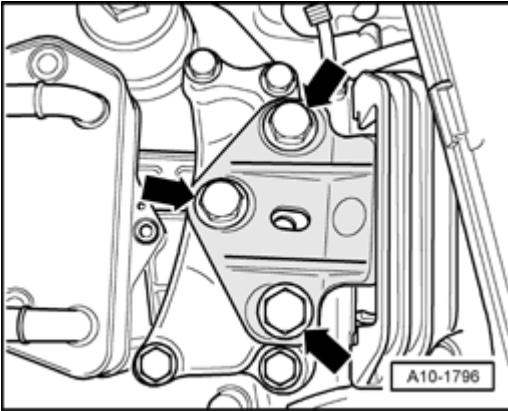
Locating Engine Carrier Bolts (Transmission Side)
